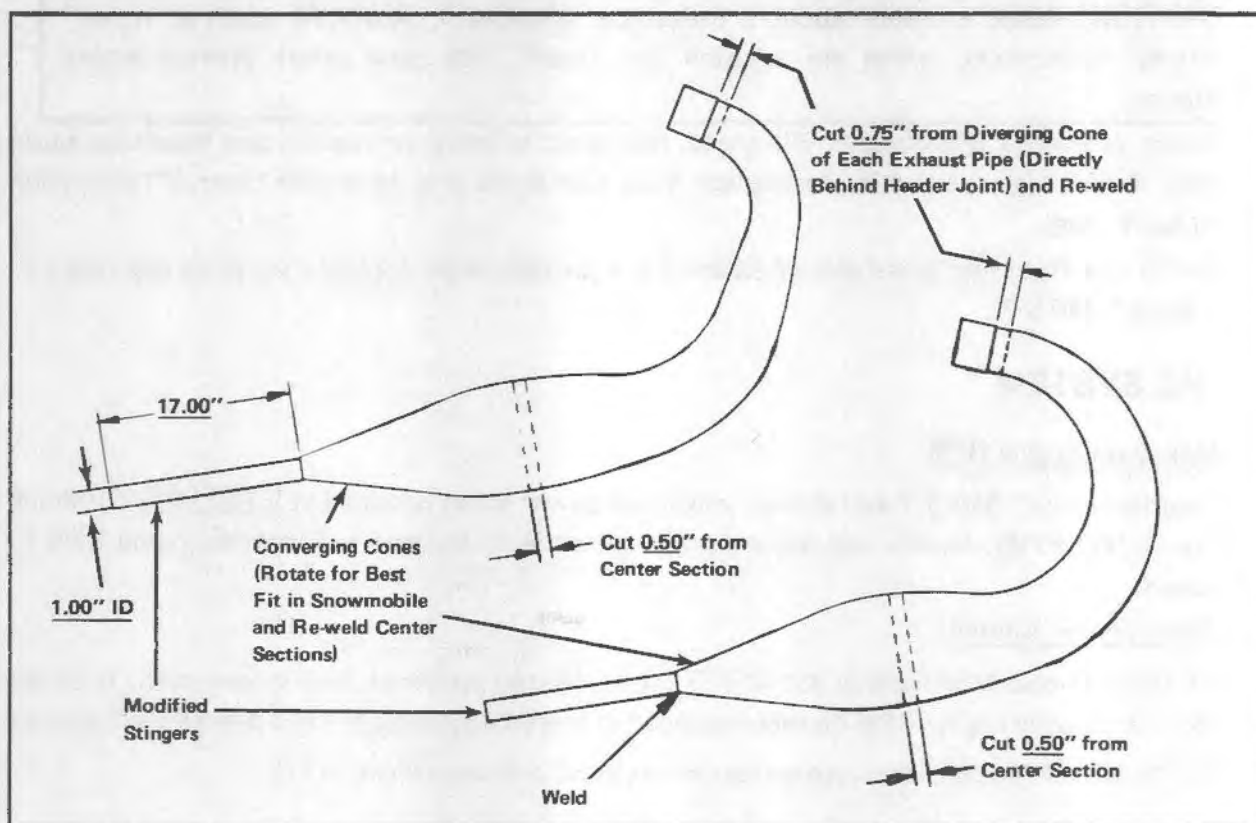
340 S/T "Modified-Stock" Exhaust Pipes
